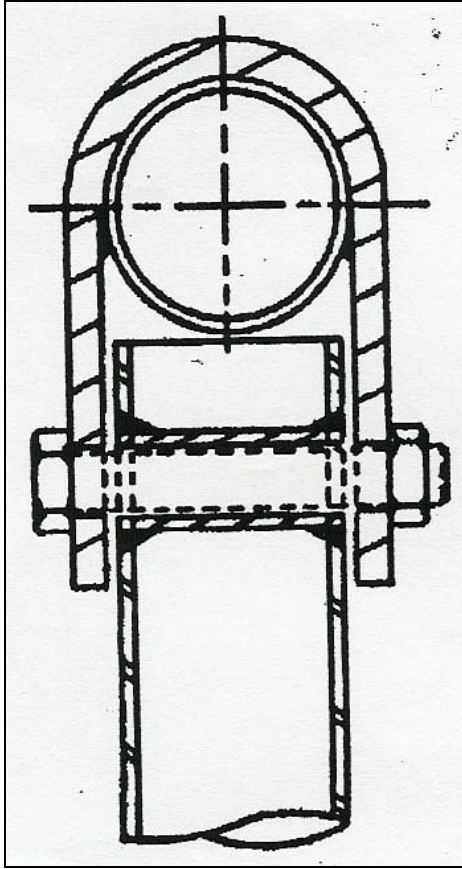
SCCA Spec Drawing for Slip Joint and Removable Diagonal
